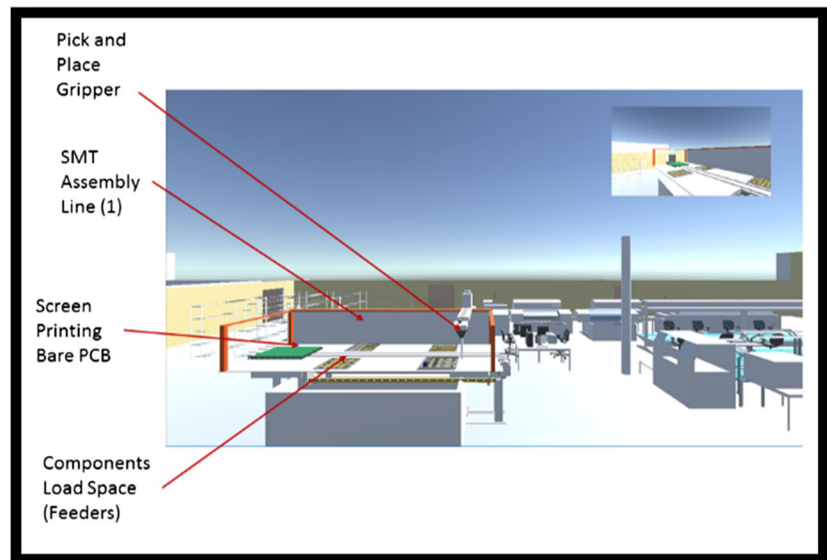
; the layout and the process elements including type of feeder, robot head, and general PCB layout configuration can be virtually modified and the resulting impact on the overall assembly can be studied interactively by teams of distributed engineers. These distributed teams can use mouse or haptic-based interfaces to study various SMT process layouts interactively using GENI-based networks; for a given PCB design where the final destinations of the various chips or components are given, the focus is on coming up with feasible process layouts which enable the assembly tasks to be completed without collisions; this analysis can be performed before any investment is made to purchase a given set of work cells or can be performed after these work cells are made available. By comparing the various layouts for the same placement cell as well as comparing layouts between two different placement workstations, the distributed teams can perform virtual process level analysis using the VR tools and networking technologies. Figure 5 shows a view of the VAE developed using the Unity 3D engine and C#. Figure 6 provides a view of the factory level simulation environment for the PCB factory.
